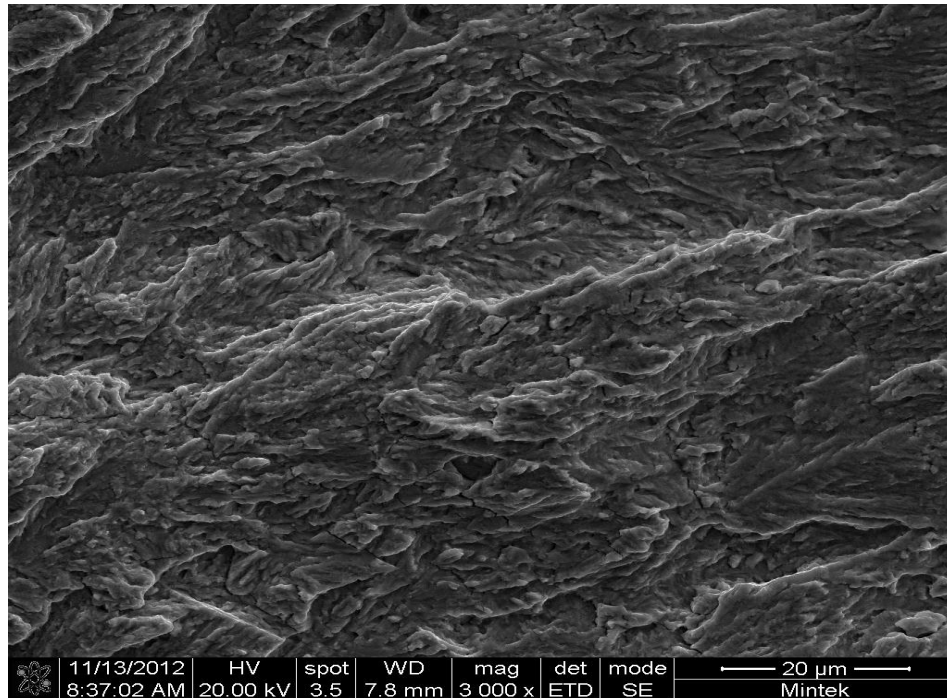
Crack initiation zone of the as-received AISI 316L steel showing brittle (tearing) fracture.
